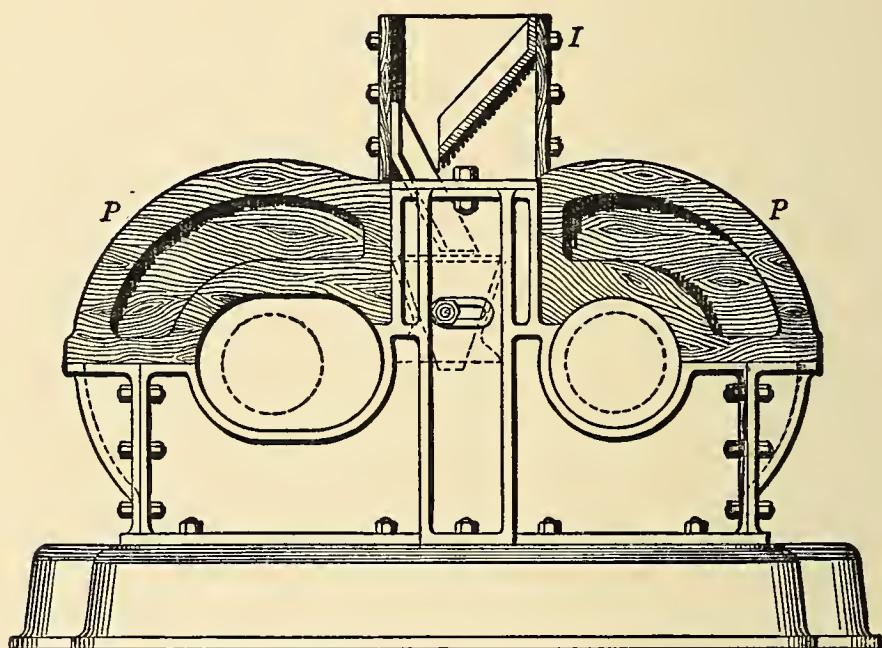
HOUSING FOR KROM'S PATENT STEEL CRUSHING ROLLS.
